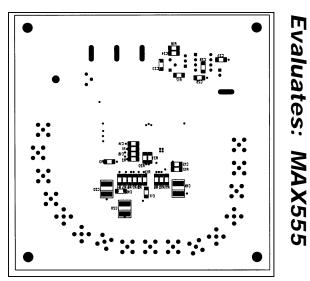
MAX555 EV Kit Component Placement Guide— Back Side
